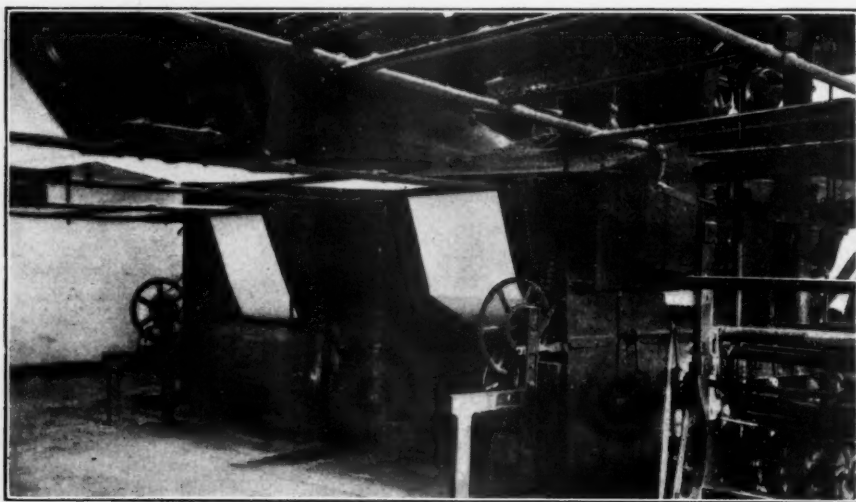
A COTTON SINGEING MACHINE IN OPERATION, EMPLOYING CRUDE OIL AND COMPRESSED AIR.
